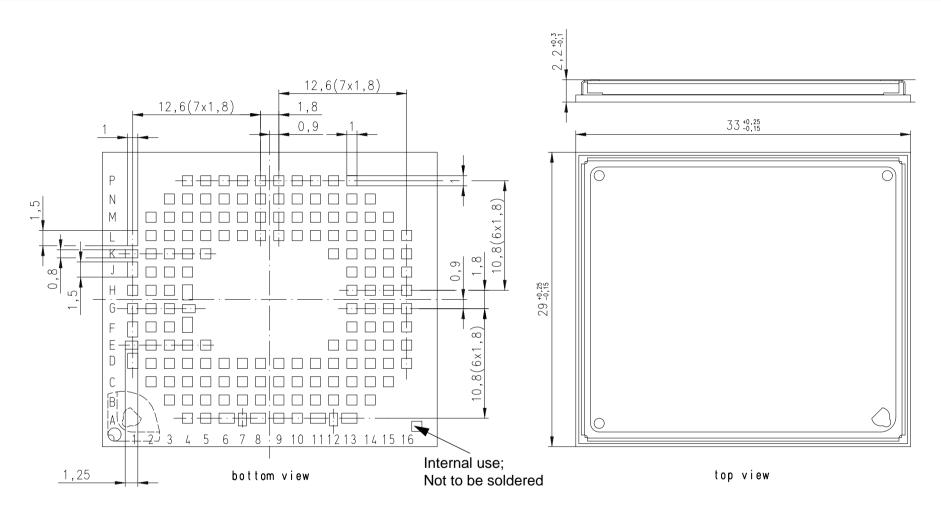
Dimensions of PLS8-E (all dimensions in mm)
